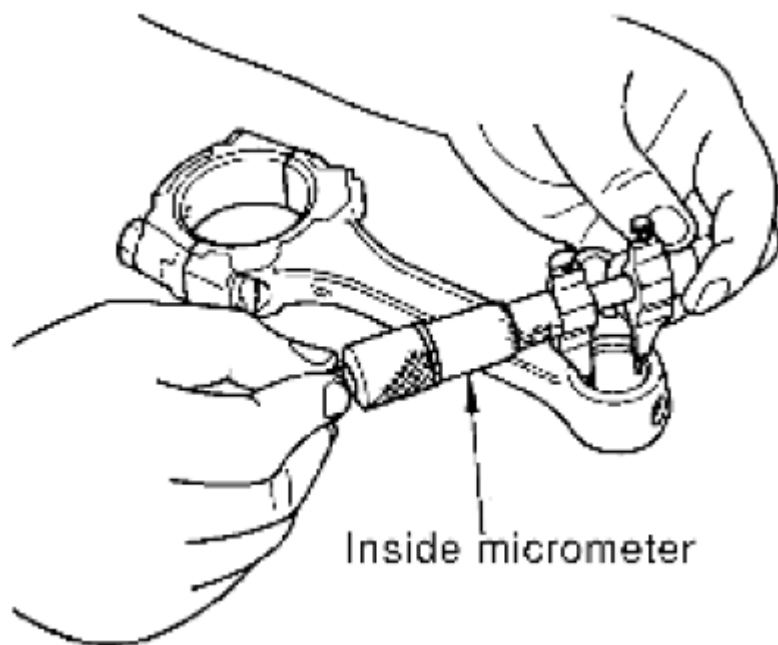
Measuring Inside Diameter Of Connecting Rod Bushing Using Suitable Tool
